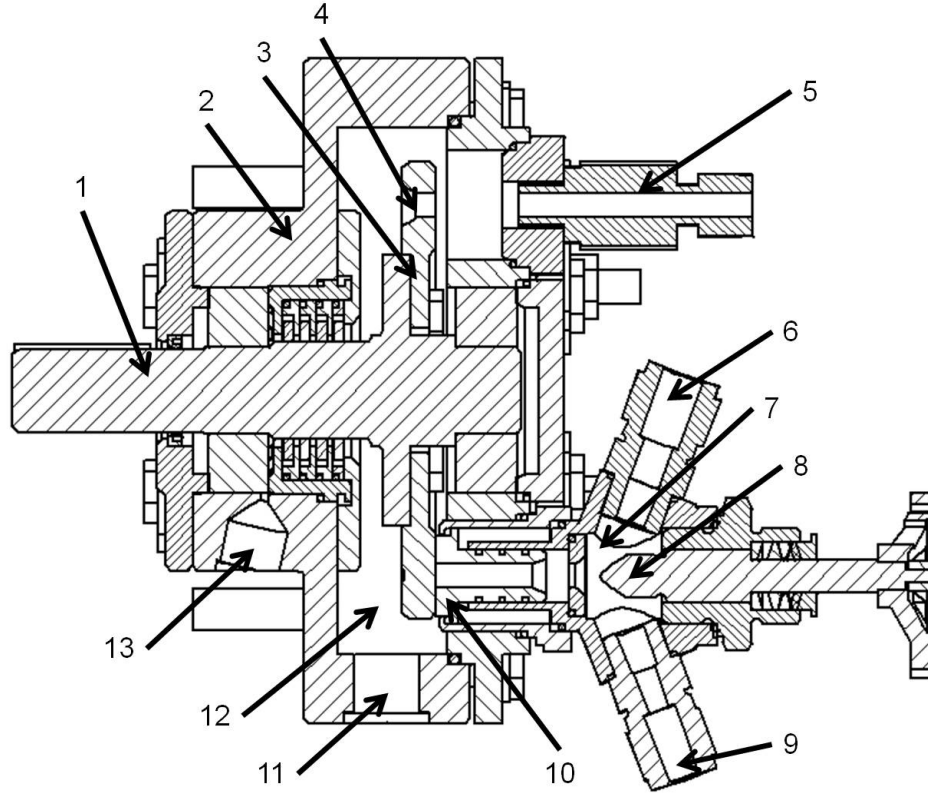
Cross section of the PRC pulsator: 1) Driveshaft, 2) Case, 3) Rotating Disk, 4) Orifices, 5) Check valve, 6) Outlet to injector, 7) Diverter chamber, 8) Orifice throttle, 9) Inlet, 10) Teflon seal, 11) Drainage outlet, 12) Drainage cavity, 13) Weep outlet. The back pressure throttle is needle valve down stream of 11.
